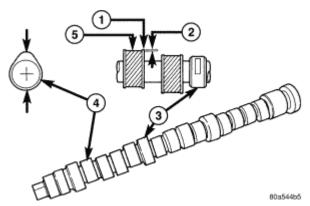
Camshaft - Inspection Courtesy of CHRYSLER LLC
